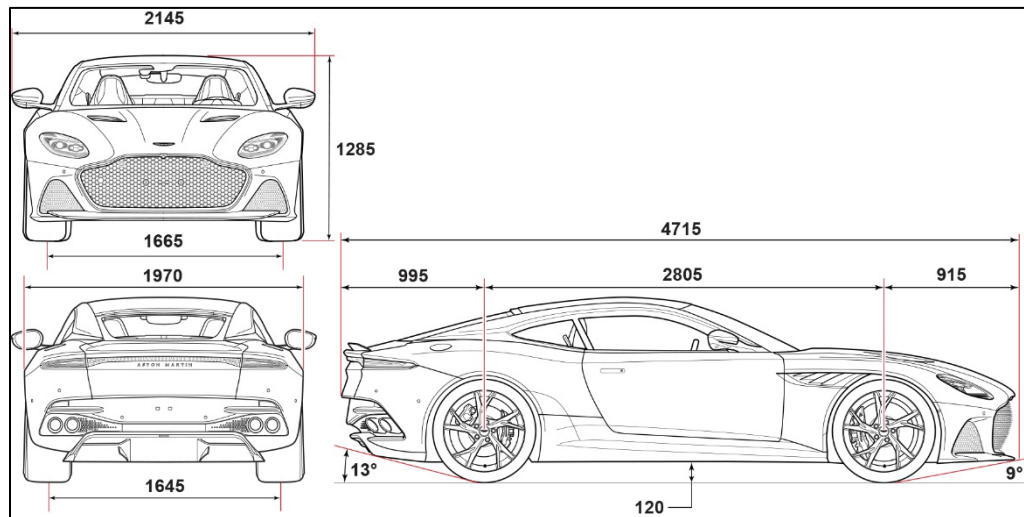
Coupe Exterior Dimensions (in millimetres)
